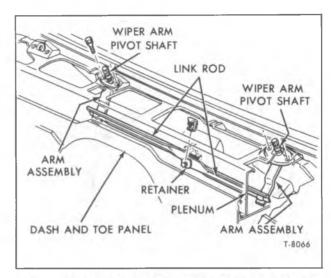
Windshield Wiper Linkage (Conv. Cab Model)
